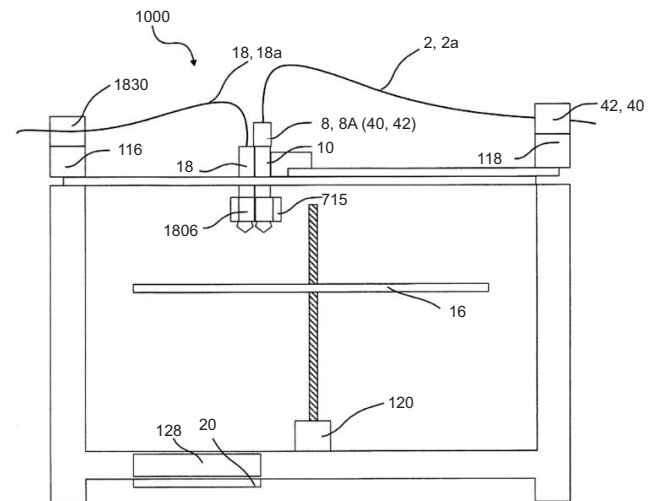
A plane design drawing for multiaxis fiber reinforcement for 3D printing [50].
